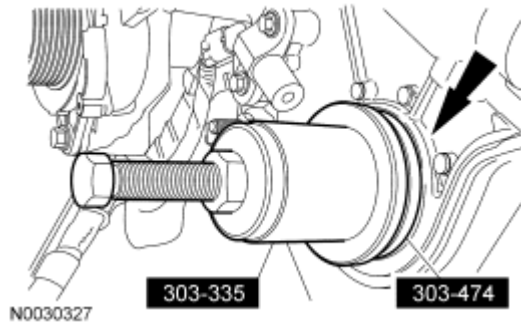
Installing Crankshaft Front Seal Using Special Tools (303--335) And (303--474)
